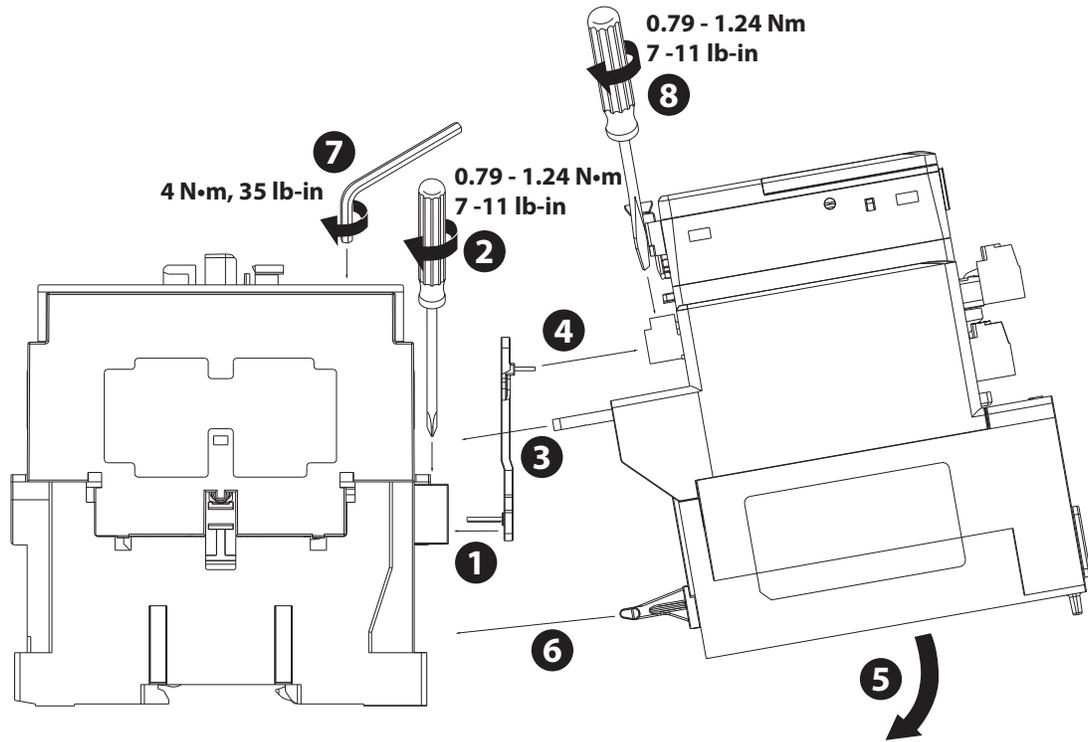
100-C09...-C55 Starter Assembly Installation
